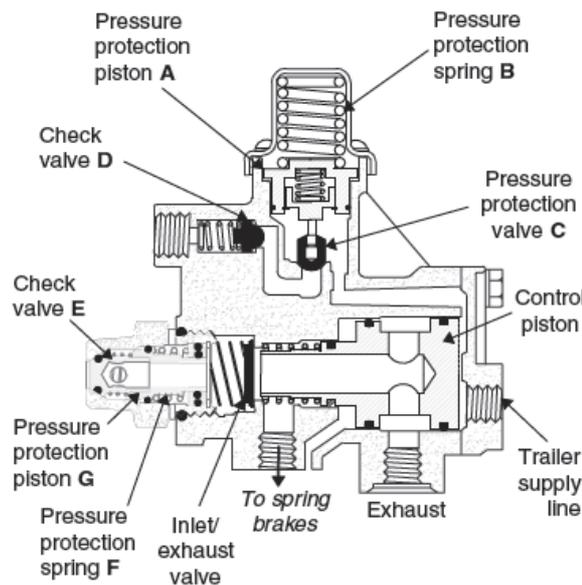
AB3802 Spring Brake Control Valve – Cross Sectional View
